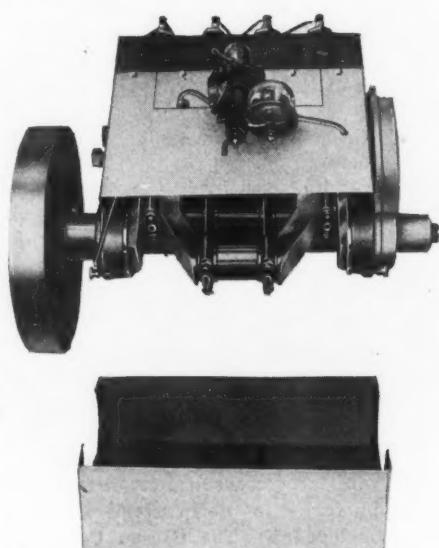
Able motor with crankcase cover removed to show crankshaft
